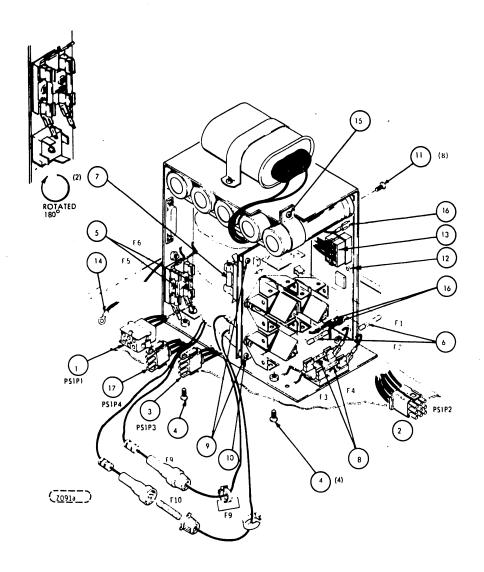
, POWER SUPPLY ASSEMBLY
